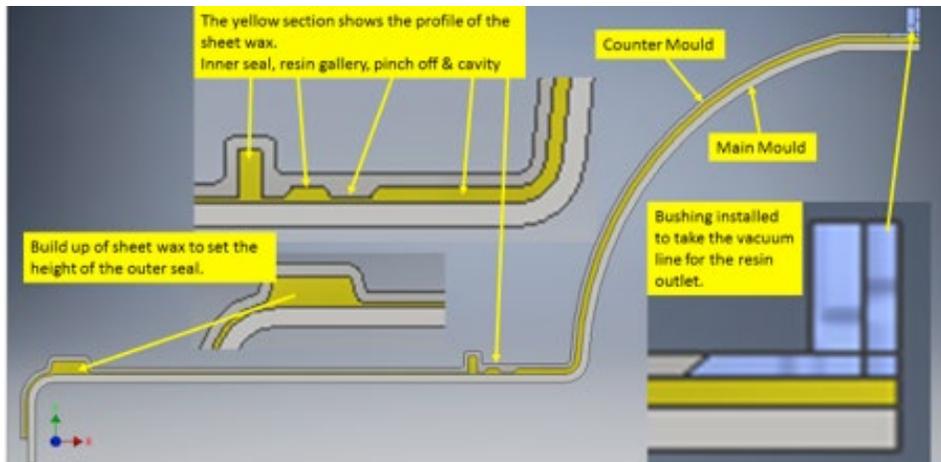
Shows a cross sectional view through the centre of "A" mould, sheet wax arrangement and counter mould.
